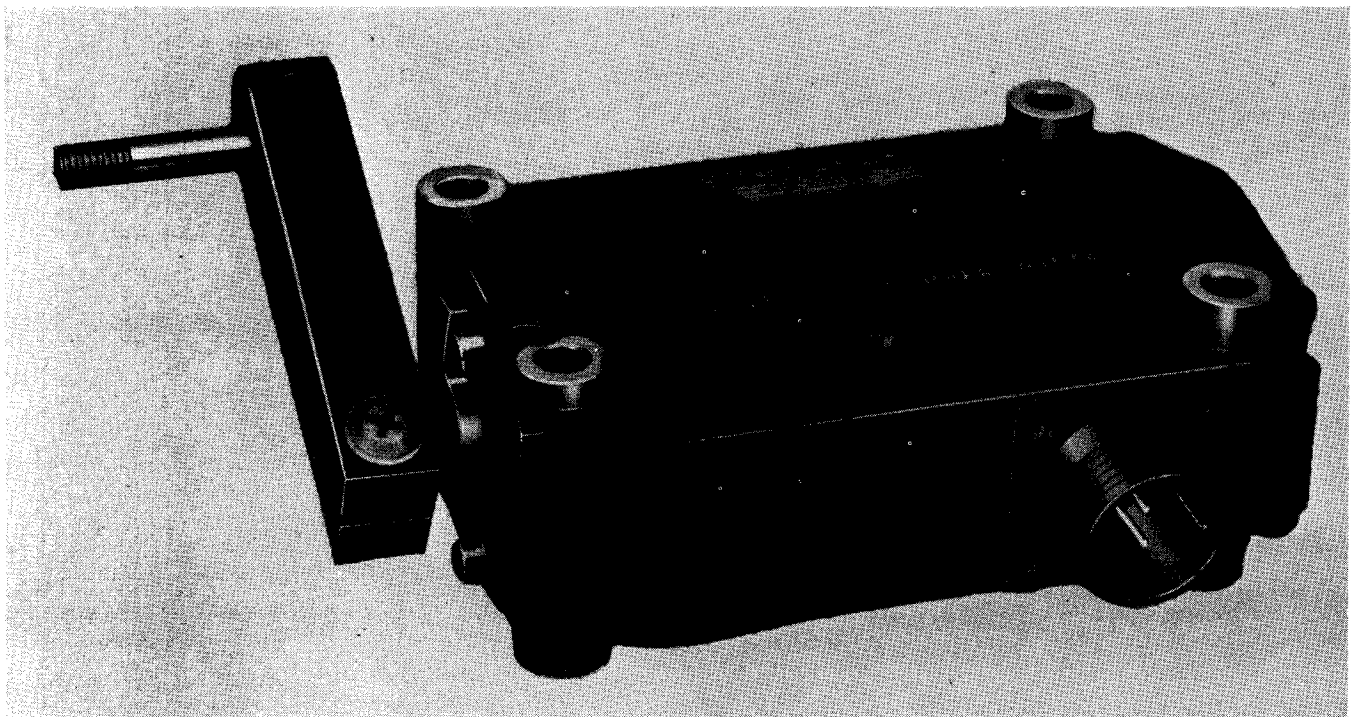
Magnetic Brake Assembly, Part No. R460M10.
